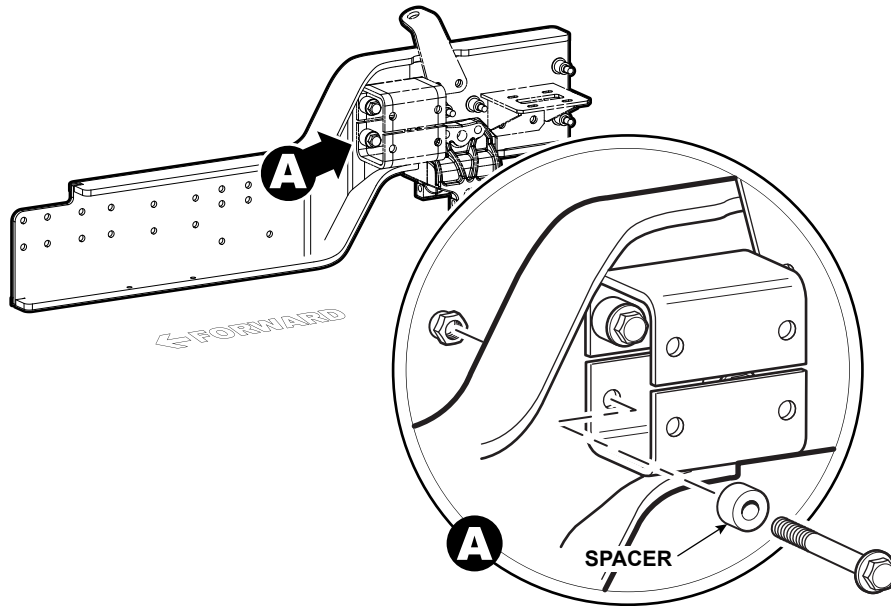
Frame Extension to Frame Rail Installation and Spacer Location LH
